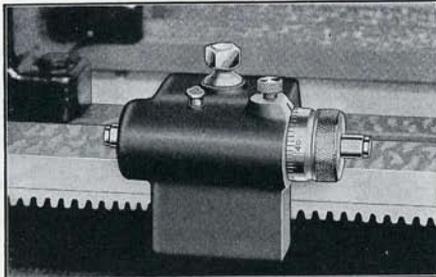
Micrometer Carriage Stop for Lathe. Cat. No. 971. Price.....\$10.00
